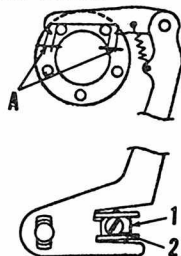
Shift arm clearance is adjusted by turning eccentric screw (2). Clearance (A) should be equal.
